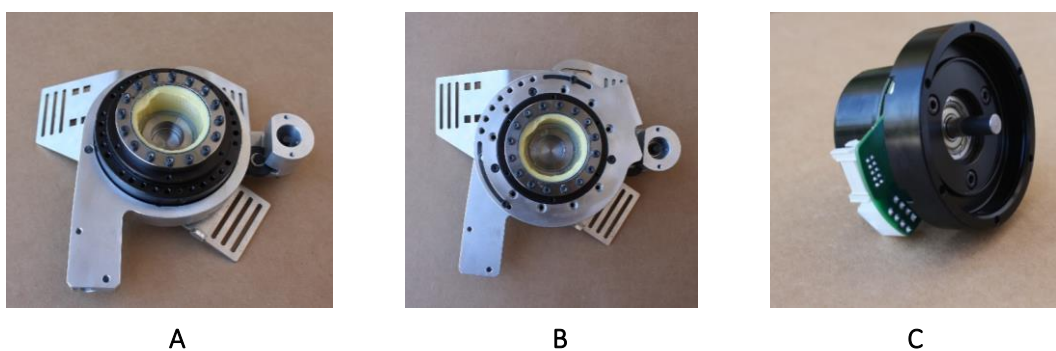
Positioning of the harmonic drive reducer (A), of the trunk flange (B) and particular view of motor+flange assembly (C).
